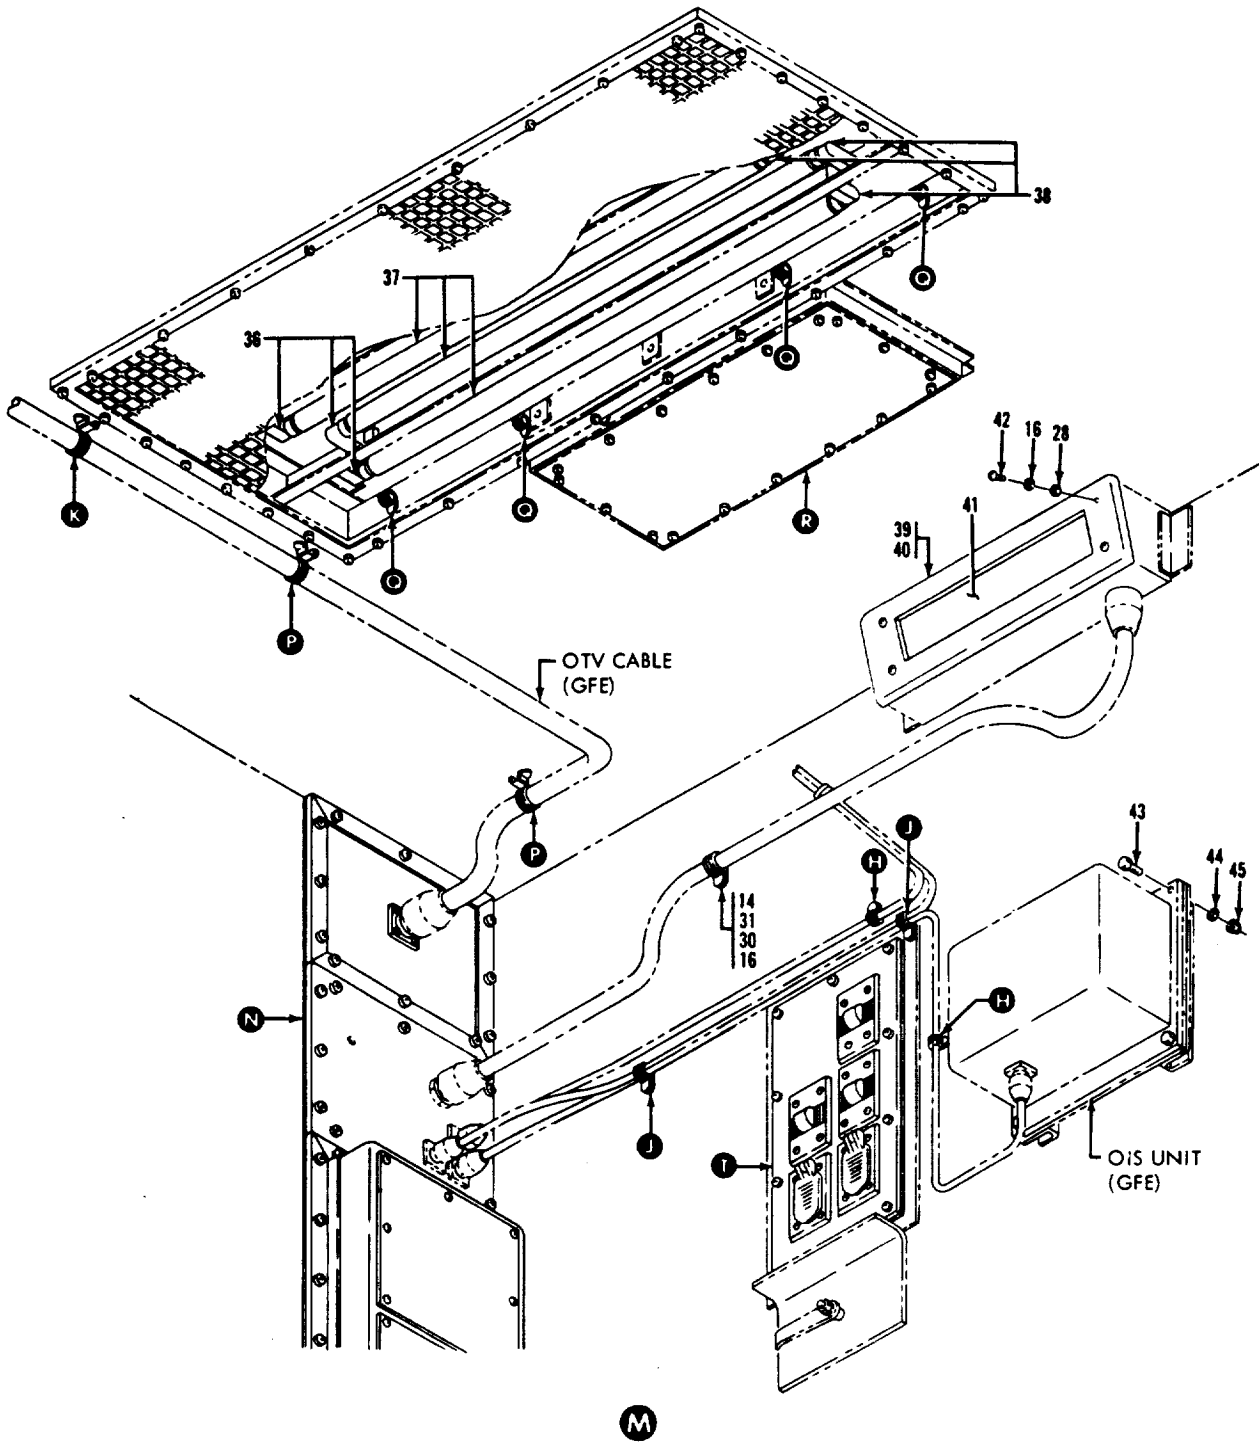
Electrical Equipment Installation (Sheet 5 of 19)
